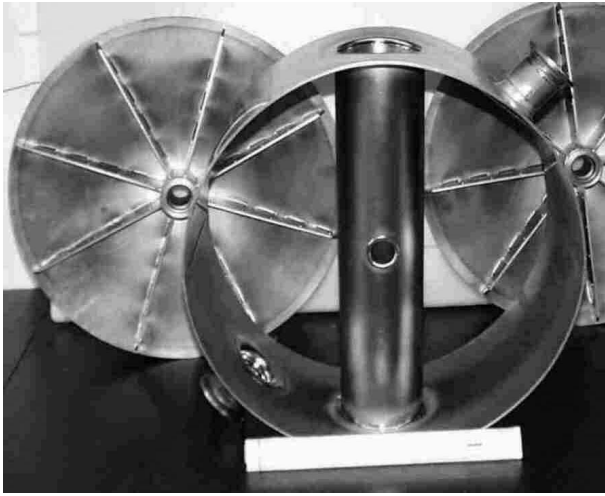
Elements of the prototype niobium cavity just before closure welds attached end sections to the spoke mid-section. A twelve-inch scale is shown.
